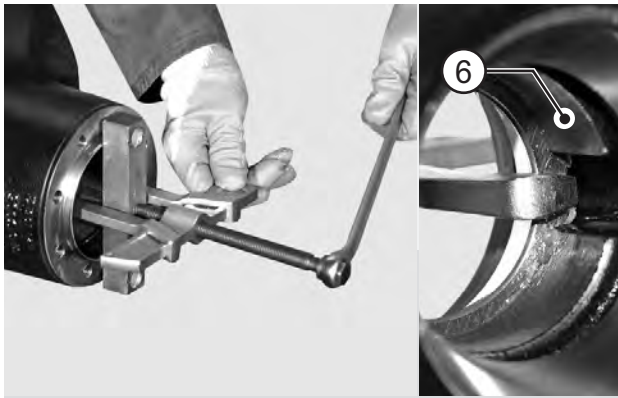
Remove the bearing cup of the tail bearing cone (6).
